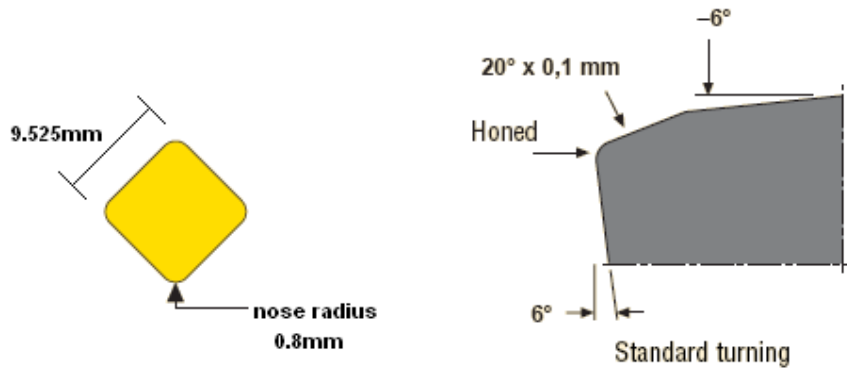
Cutting tool specifications used for the inserts produced and tested during this project.
